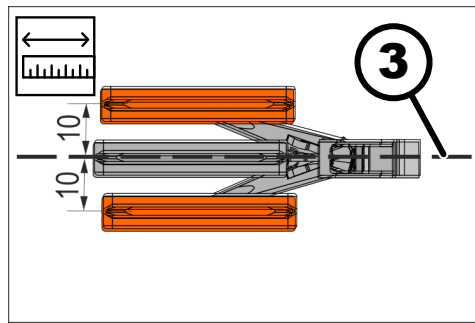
Align the sliding contacts of the current collector in the center of the conductor rail axis and check the lateral tolerance of the sliding contacts.
